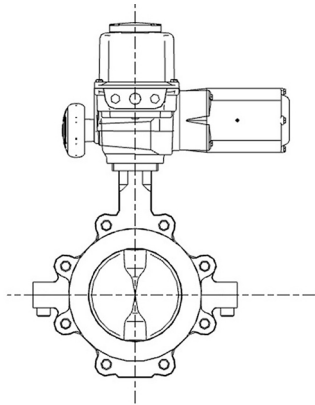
Sectional drawings of KE Elastomer for DN 40 - 300
